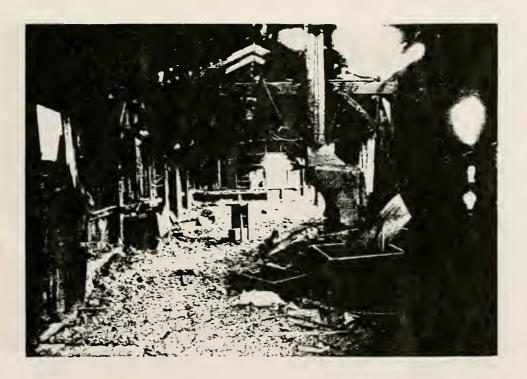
Interior of Blacksmith's Shop (structure #43), south view. Arrows indicates gas-fired hearth and steel chimney.
